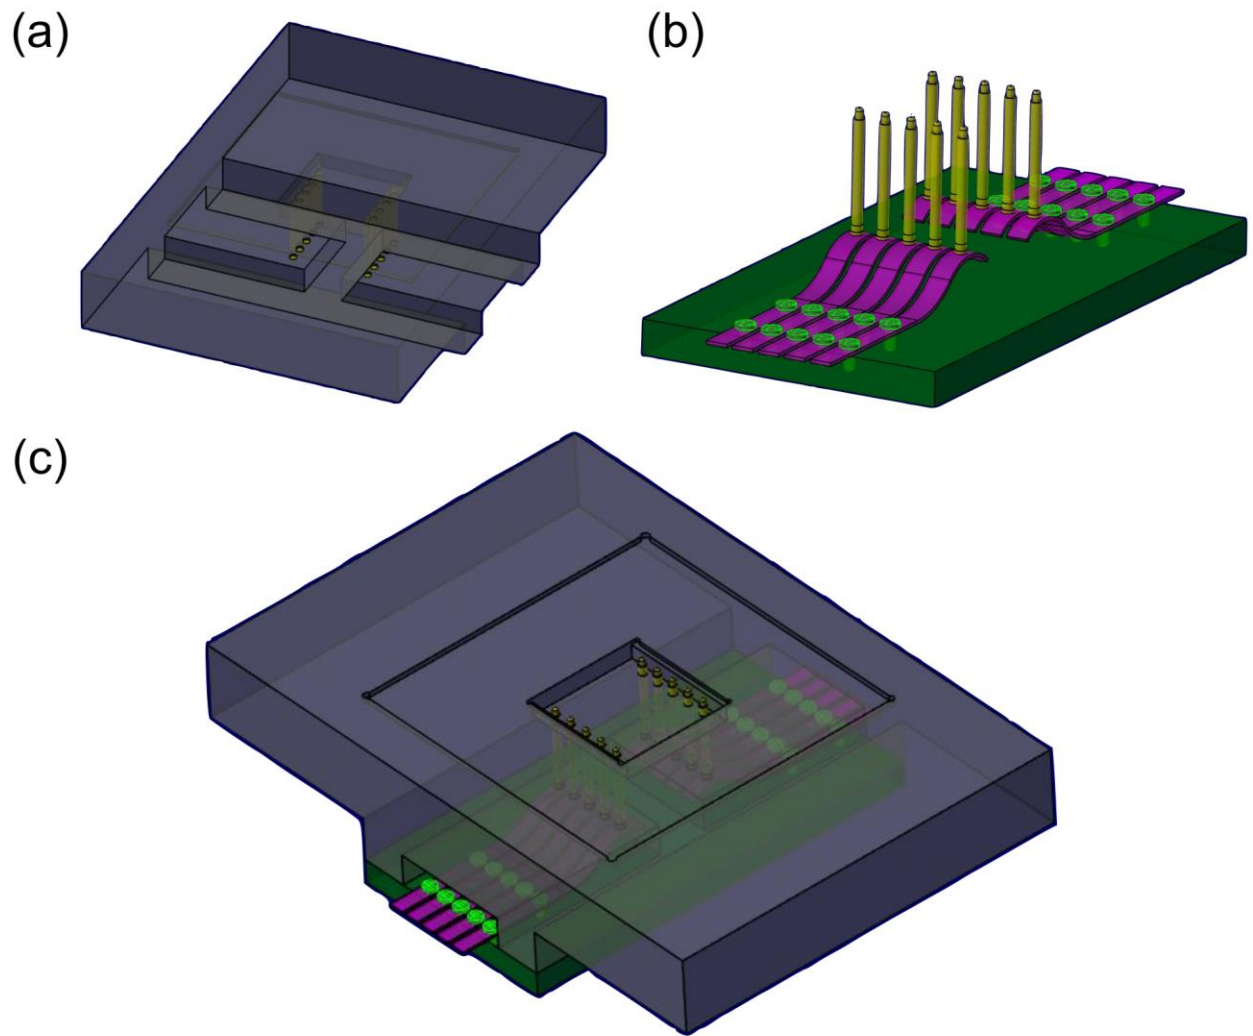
(a) CAD render of the top of the substrate holder (grey, view from bottom), showing the bottom of the spring-loaded gold-coated pins (gold) that penetrate through the holder to contact the substrate. (b) CAD render of the bottom of the substrate holder (green, view from top), showing the metal contacts (magenta). (c) A combined CAD render of the top and bottom of the sample holder (top view).
